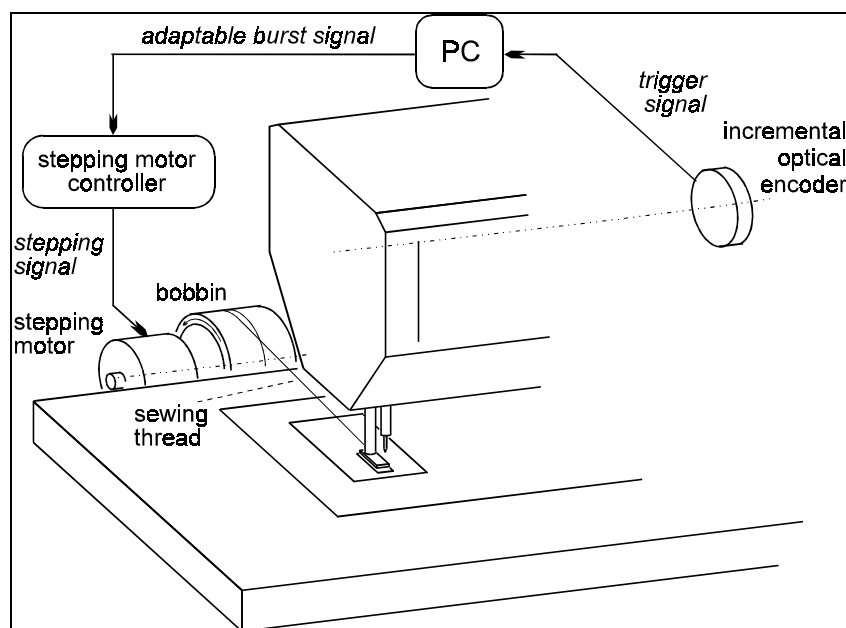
Take up mechanism for the sewing threads loaded during the sewing process
